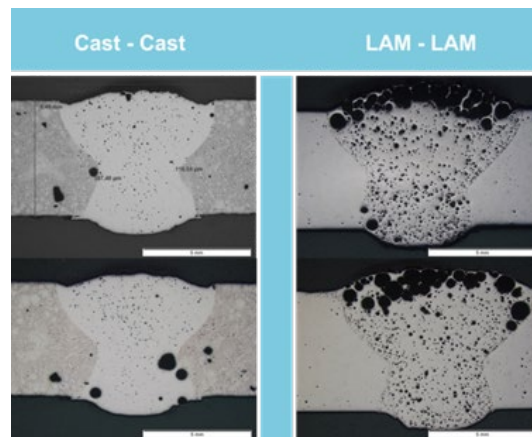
Comparison of weld seam porosity (a) Cast material (b) Laser Additive Manufactured
